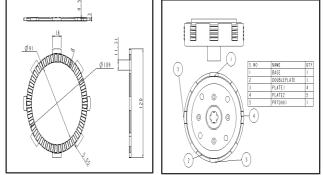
2-D representation of Friction-Plate and Assembly of Clutch.
